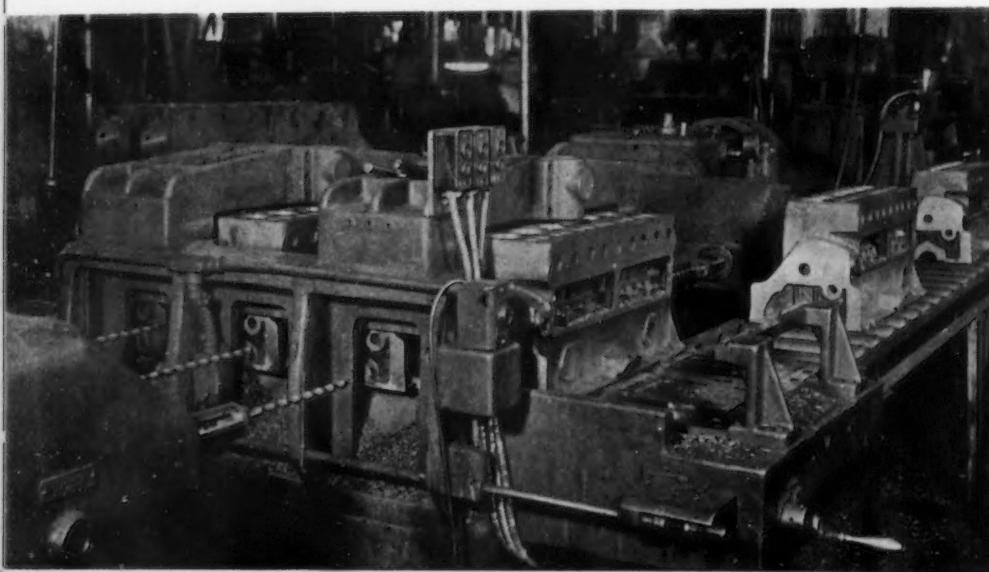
Drilling of oil gallery holes in three stages is accomplished in this 4-station 2-way machine. Indexing and clamping is effected by hydraulic power.
